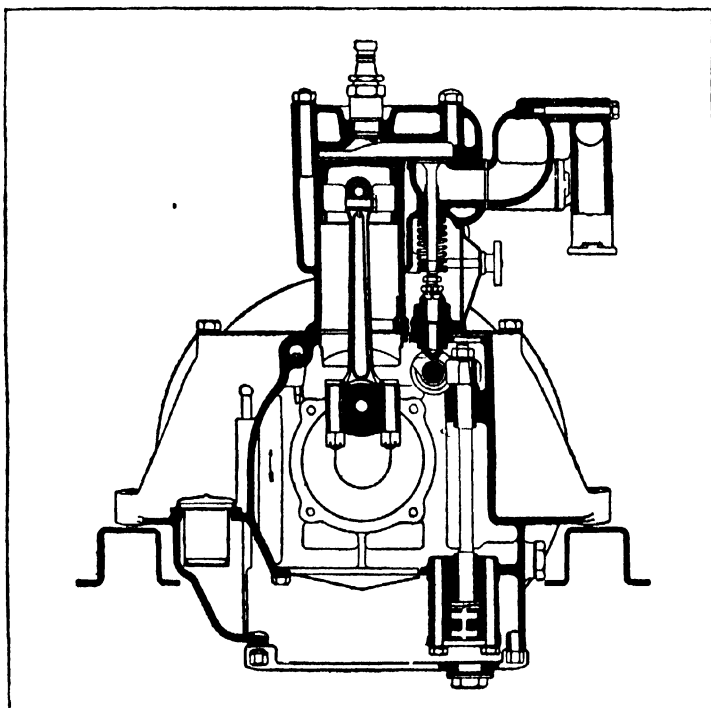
SECTION OF 7 H.P. AUSTIN ENGINE
